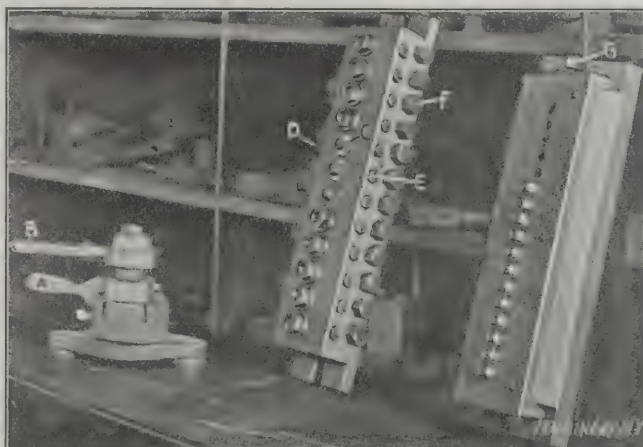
Interesting Types of Fixtures for Holding Shoulder Nuts and Collar Head-screws, while they are being milled
